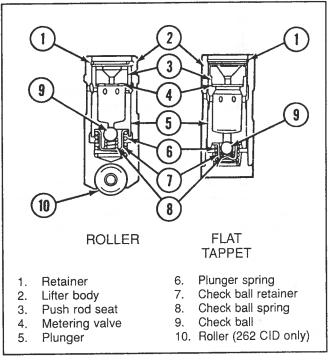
Typical Hydraulic Valve Lifter Assemblies
